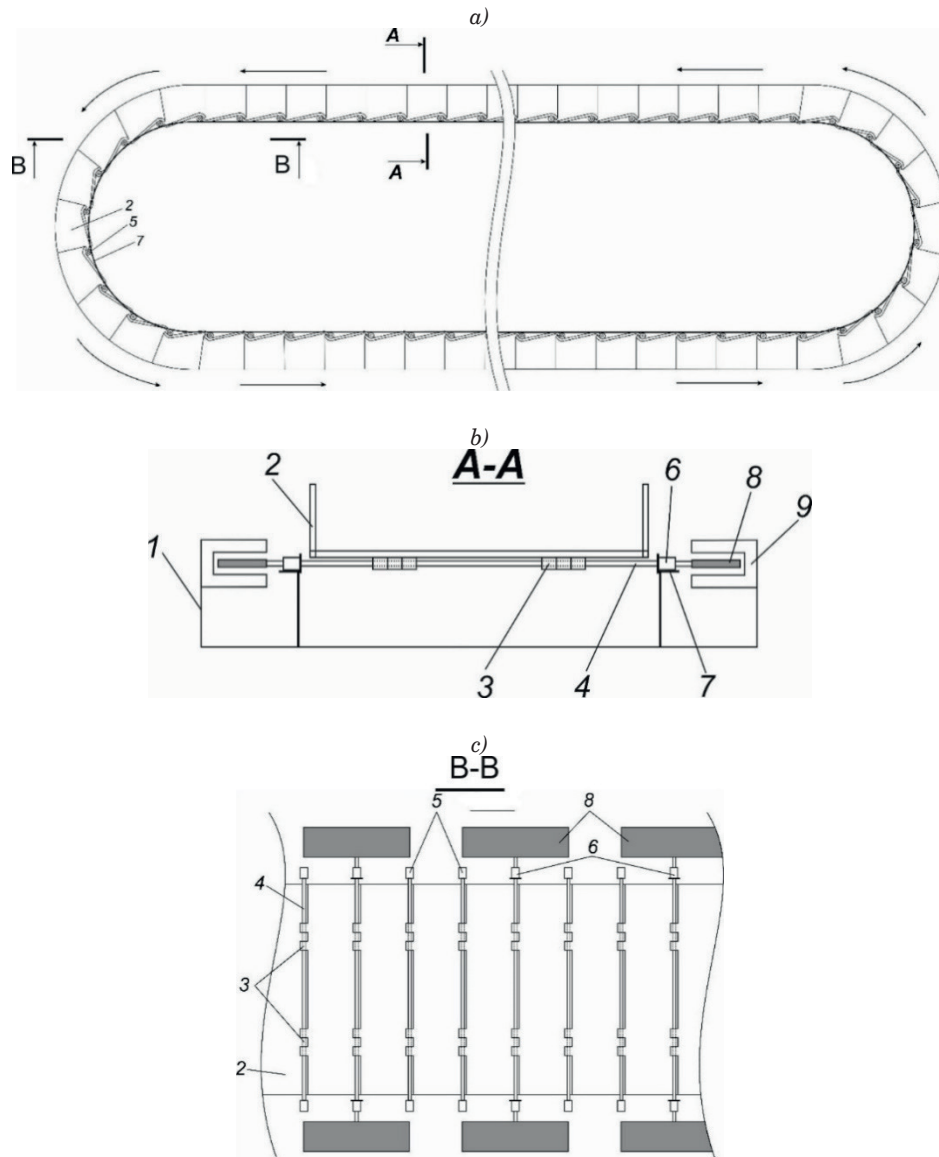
Structural design of an apron conveyor with a system of several drives with linear asynchronous motors: a) The side view of the conveyor; b) A-A conveyor section; c) B-B conveyor section; 1-frame, 2 - base, 3 - plate swivel assembly, 4 - axle, 5 - travel rollers, 6 - travel flanged rollers, 7 - travel roller guides, 8 - linear motor rotors, 9 - linear motor stators
